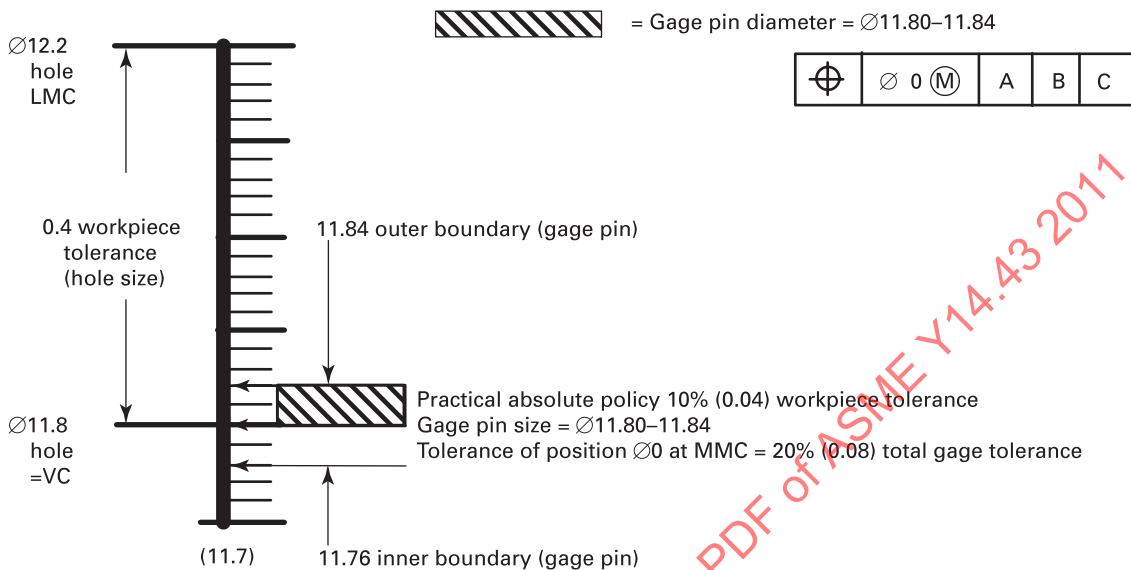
(b) Practical Absolute — Direct Percentage Tolerance Method
